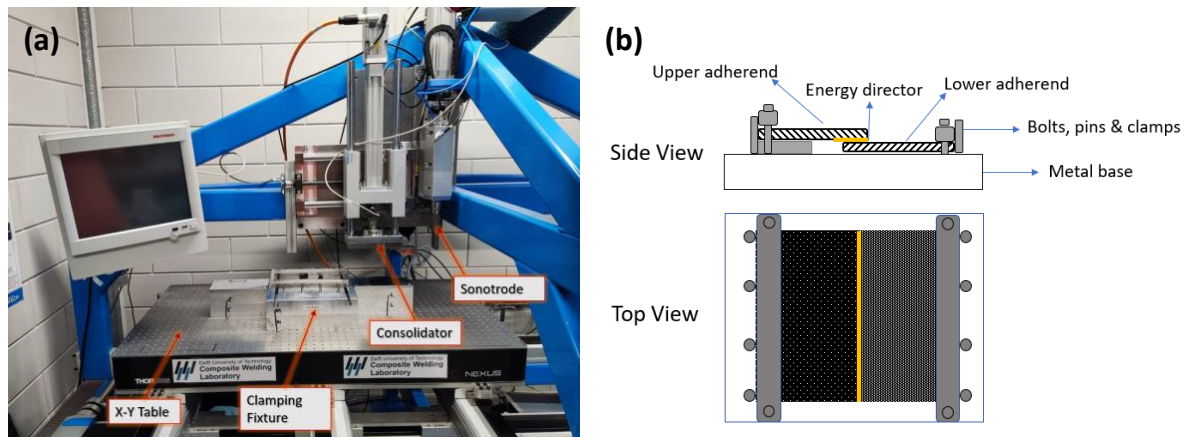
(a) Continuous ultrasonic welding system, (b) the welding clamping fixture that is used for adherend and ED placement for CUW experiments
